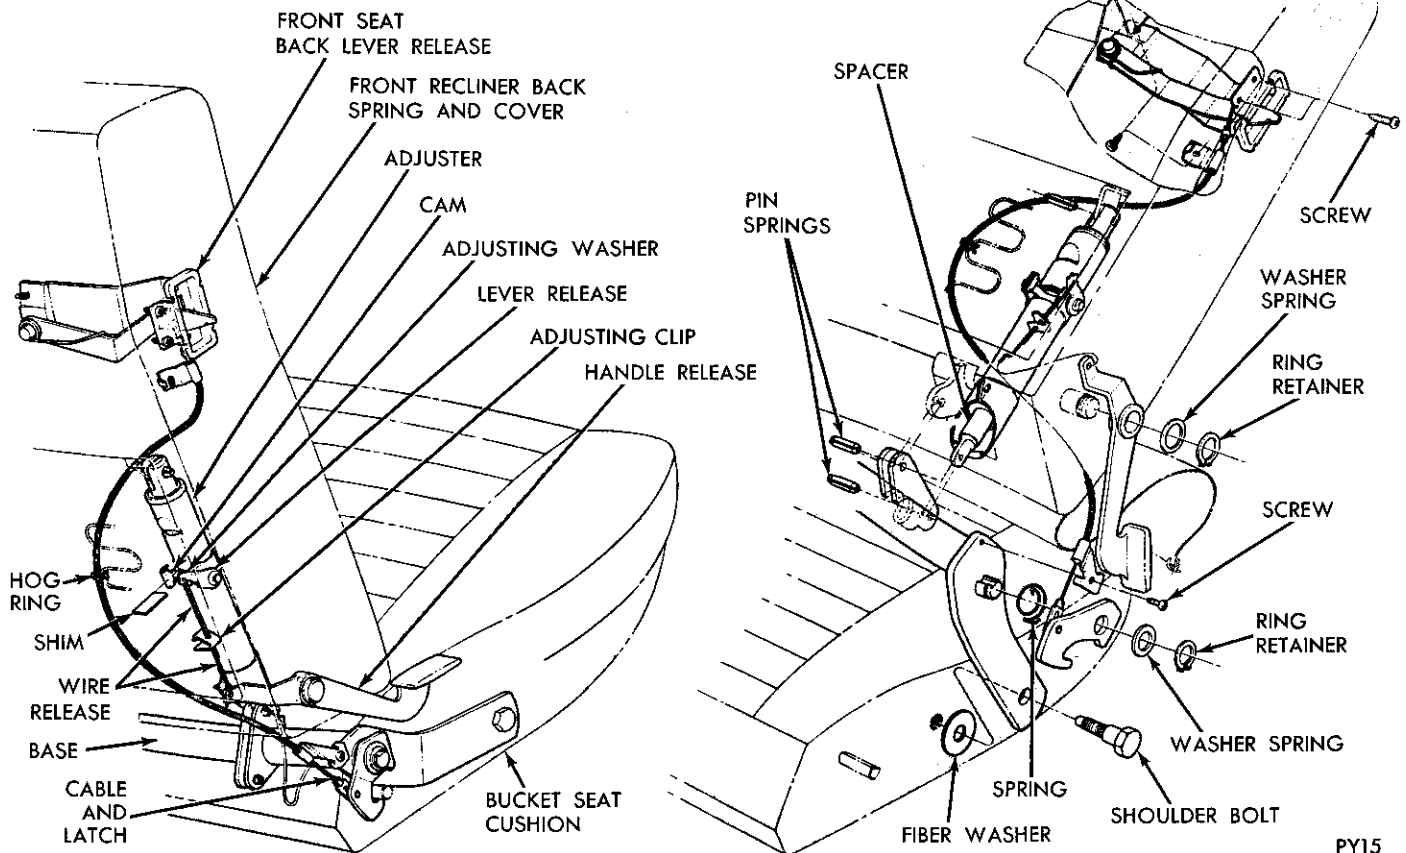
Reclining Seat Mechanism (Bucket Type)
